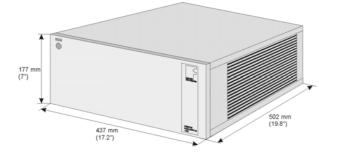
Dimensions, KOERZIMAT CS measuring module
